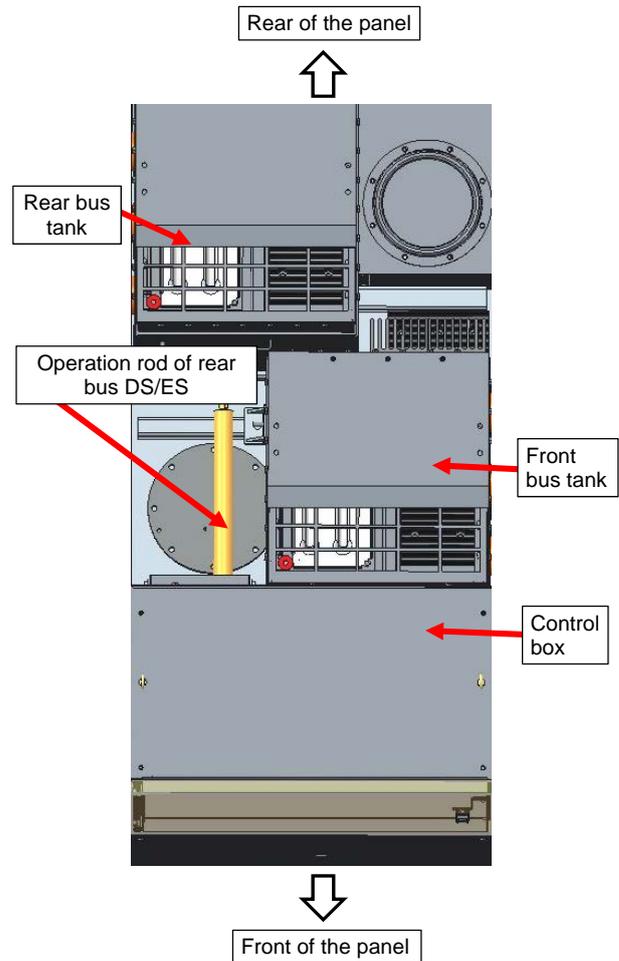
Top view of double bus configuration of C-GIS Type “HS-X”
